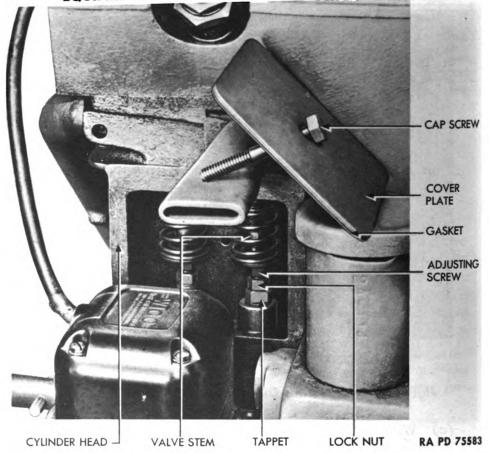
Diaphragm Pump Engine Valve Tappet Adjustment Provisions
